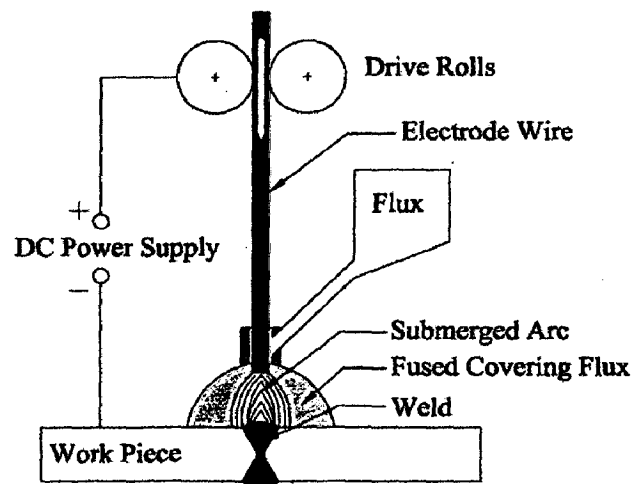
Schematic diagram for submerged arc welding Process [32]
